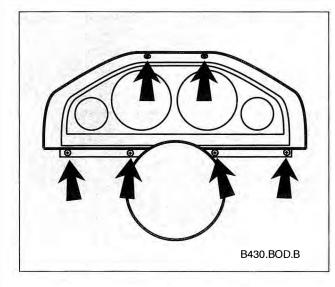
Instrument cluster trim plate retaining screws (arrows) to be removed.
